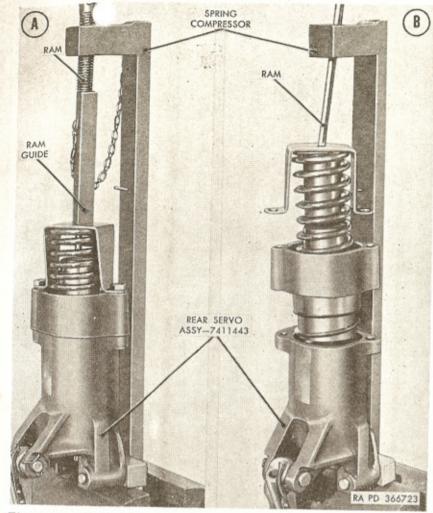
Use of rear servo spring compressor—C7950334 for disassembly.
